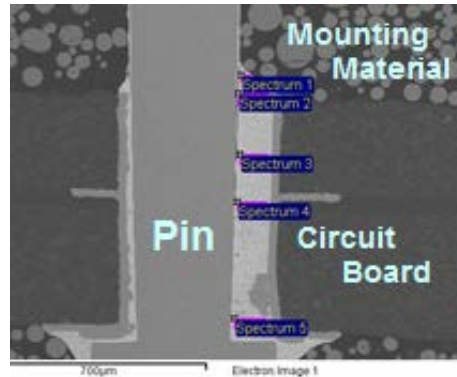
Cross-Sectional View of Pin in Plated Through Hole Solder Joint (150X).
